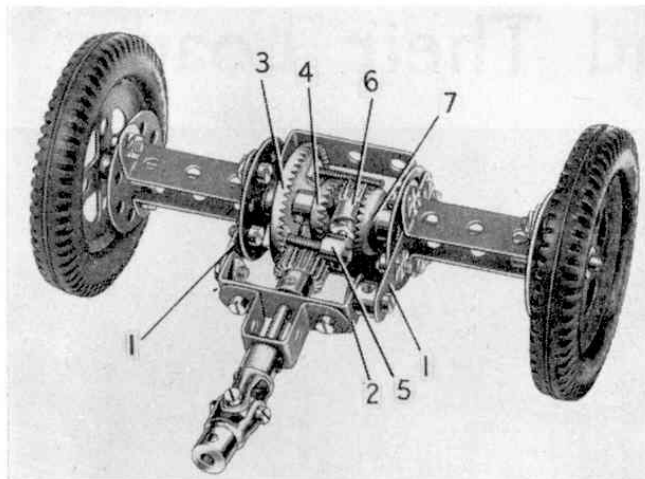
A sturdy rear-axle incorporating a compact differential drive that makes use of Contrate Wheels and Pinions.
